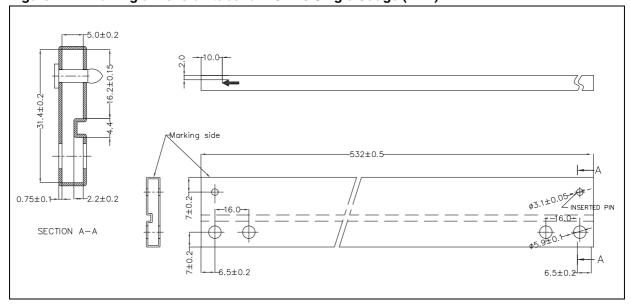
Drawing dimension TO-220 (type STD-ST Single Gauge)
